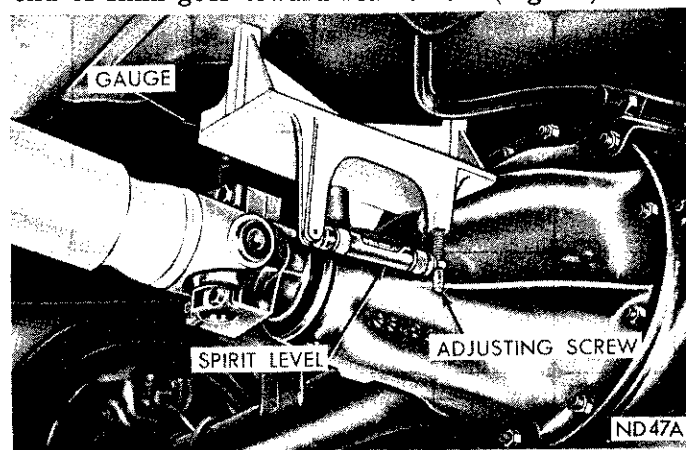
Adjusting Gauge on Differential (Rear Joint Angle Reference)
